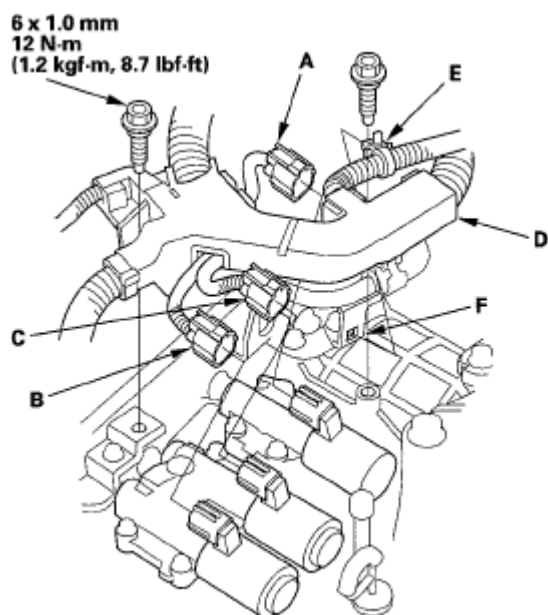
Identifying A/T Clutch Pressure Control Solenoid Valve A Connector And A/T Clutch Pressure Control Solenoid Valve B Connector
